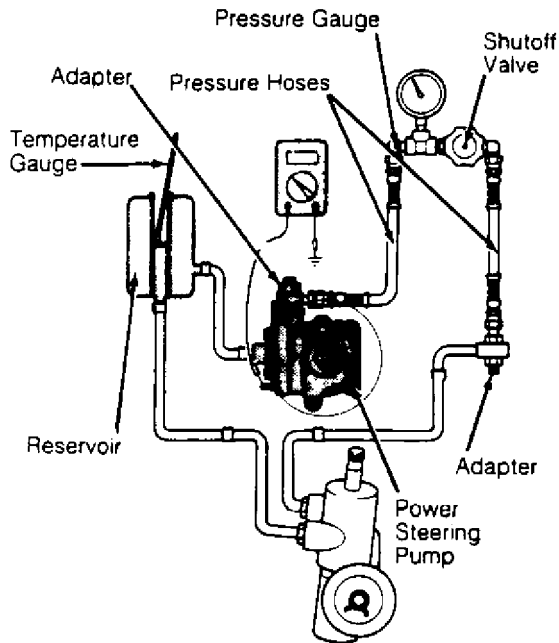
Connecting Pressure Gauge Shutoff Valve Assembly
